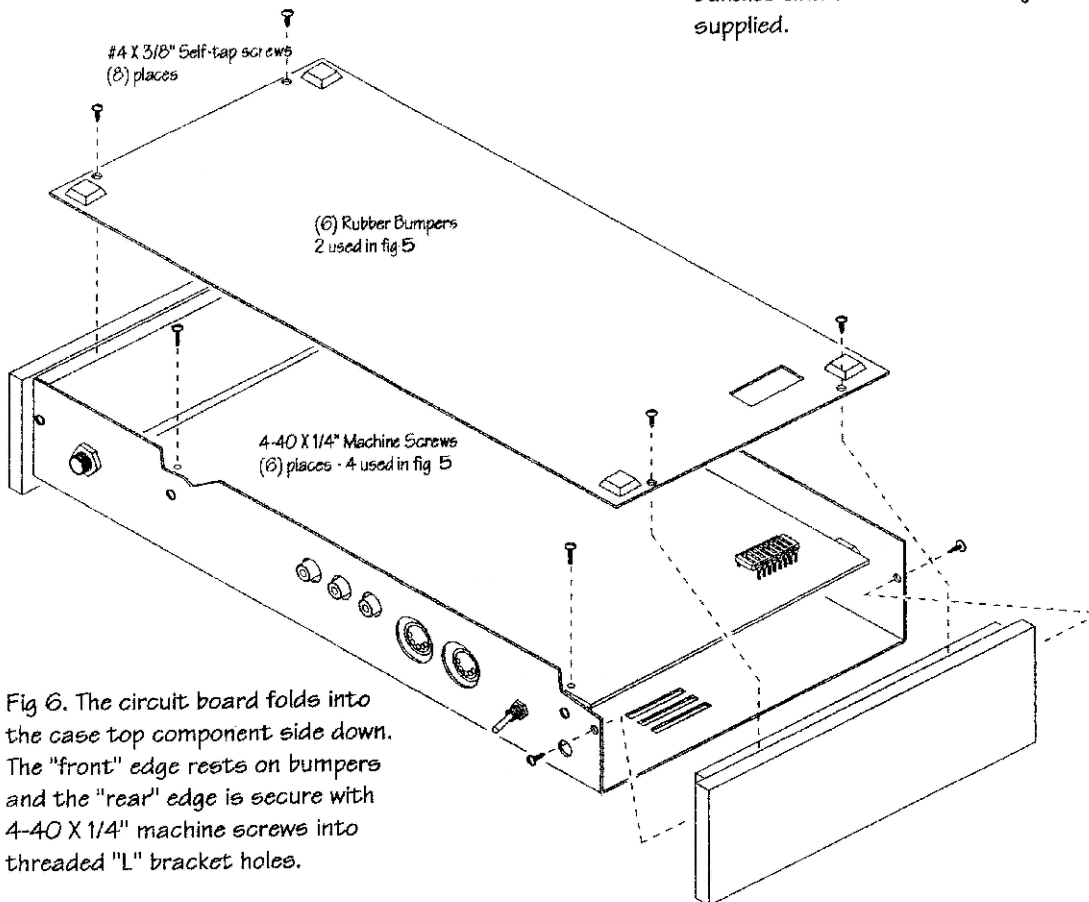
The circuit board folds into the case top component side down. The "front" edge rests on bumpers and the "rear" edge is secure with 4-40 X 1/4" machine screws into threaded "L" bracket holes.
